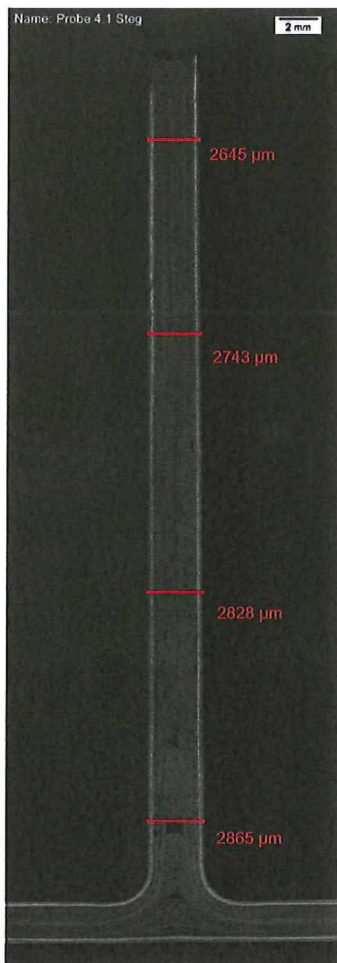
Cross section of panel 13.1 stringer 1 skin
